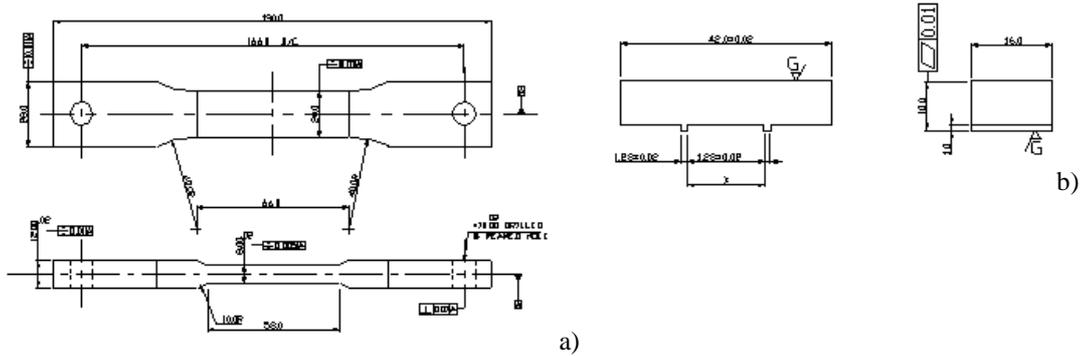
a) Testing specimen and b) bridge pads. All dimensions in mm.
